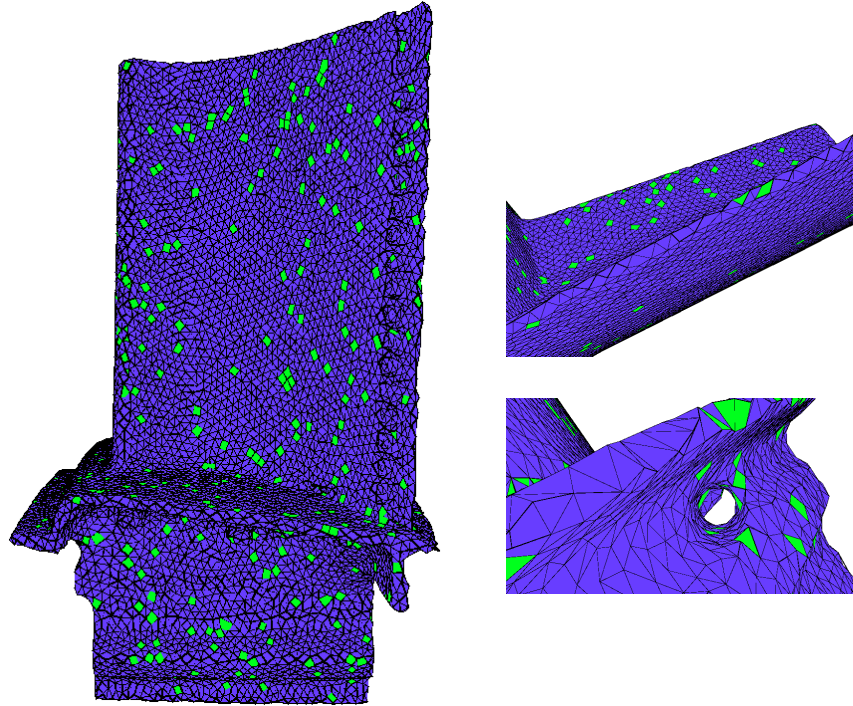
Turbine blade: full view (left), cutting edge and screw hole (right)
